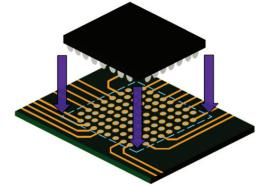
Valor Parts Library shows how components will actually fit on footprints.
